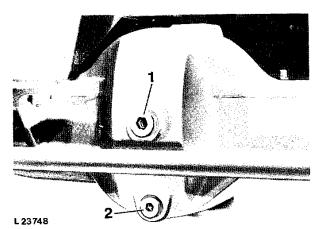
Axle Housing (up to Serial No. 449999 L)
